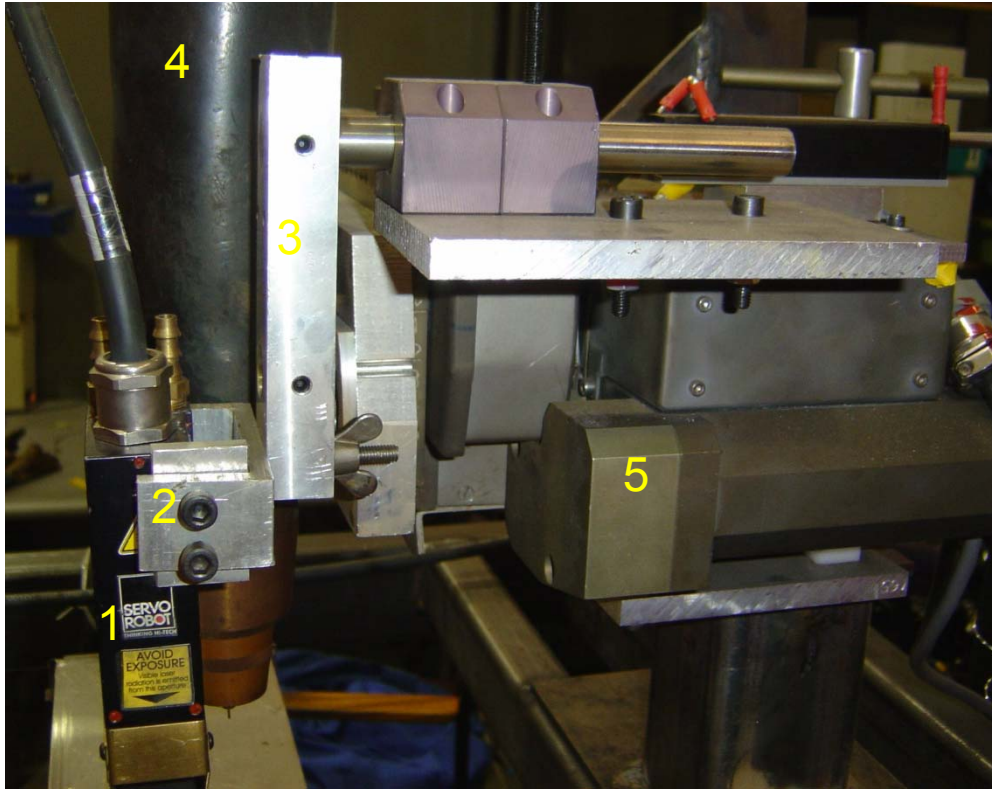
Welding head with laser sensor attached to the main body.
